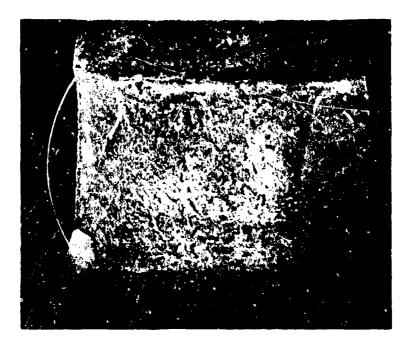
Fracture surface of 17-4PH solution heat-treated Charpy specimen tested at  $-196^{\circ}$ C, 10x.
